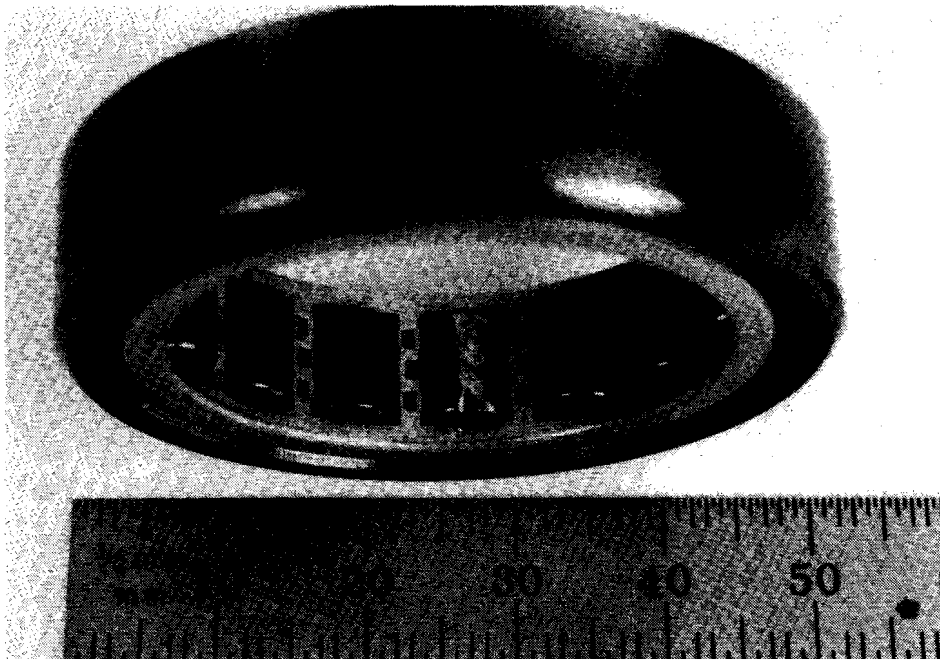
90-Degree Gearbox -411 Bearing Roller C/D Fault,
